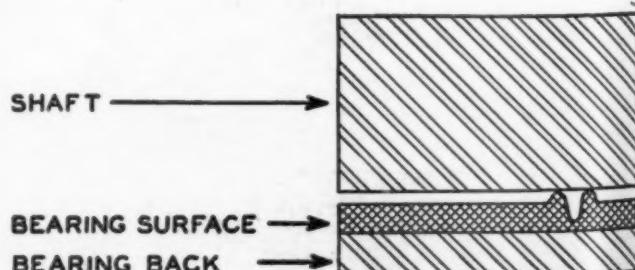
Showing on an exaggerated scale how a particle of foreign matter thicker than the oil film can scratch or score the bearing surface
